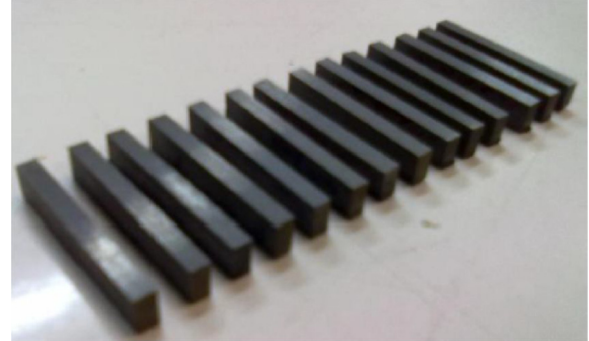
Grinding workpiece specimens (rectangular bars of  $42 \times 8 \times 4$  mm).
